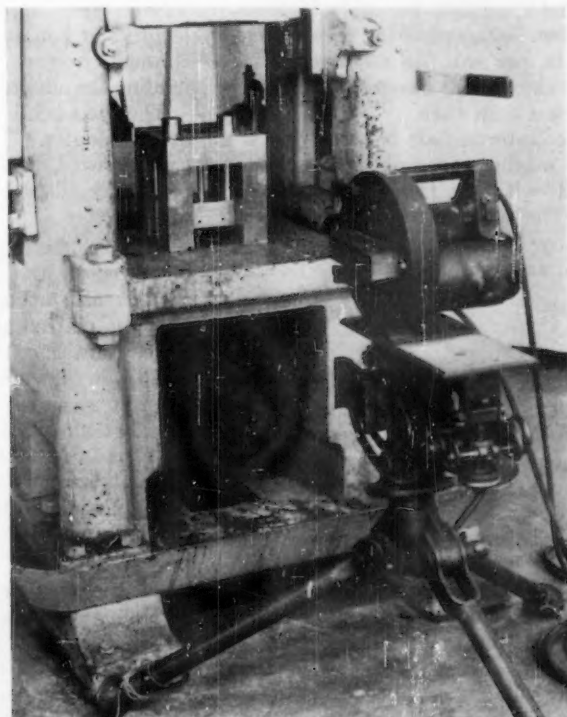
Arrangement of Camera and Special Fixture in Crank Press.
